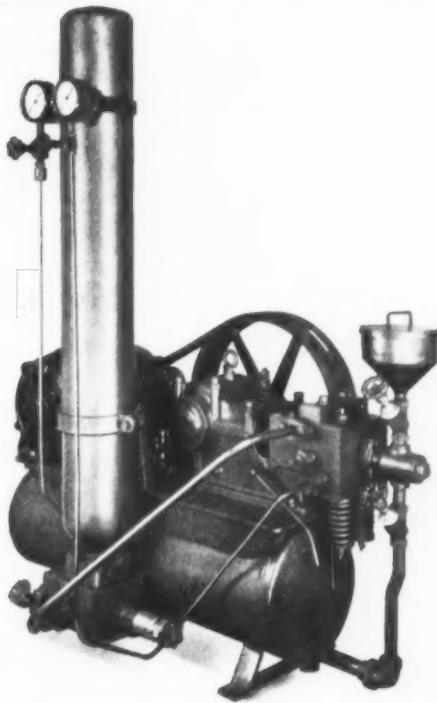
Hydraulic Power Units have been Developed in Five Sizes for Operating the Madison-Kipp Brass Die-casting Machines
